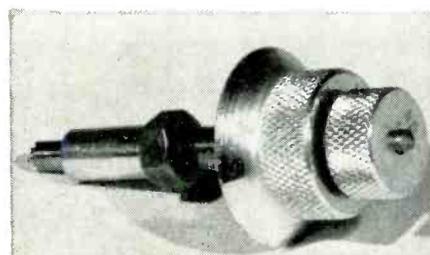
RCA's tool for severing hole in coaxial transmission line.
